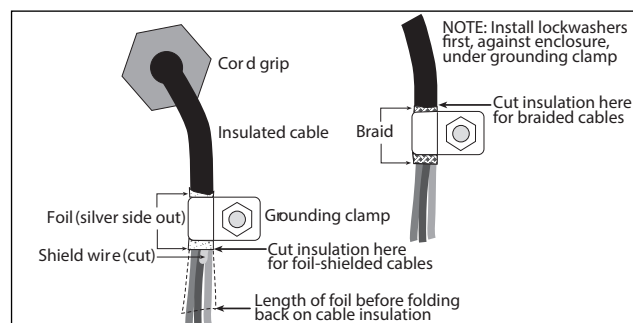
Grounding Clamp Attachment for Foil-Shielded and Braided Cabling
